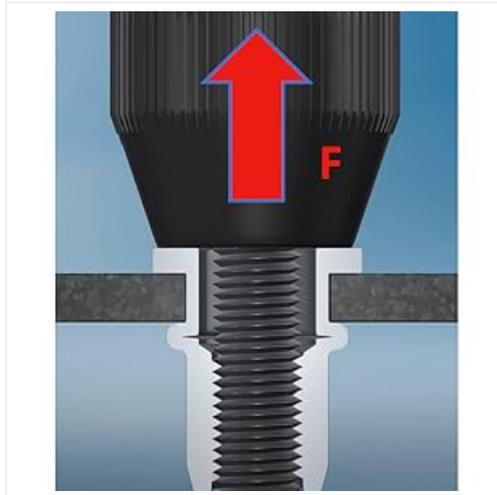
The tool pulling the rivet nut to create a secure fastening.
